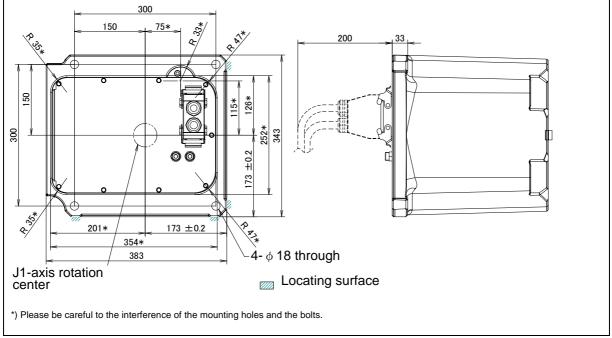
(b) Dimensions of the robot base (bottom connector plate)
